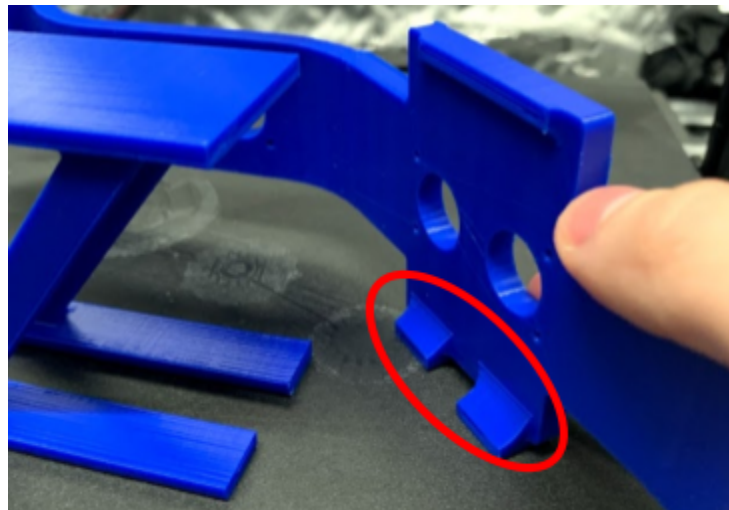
Example of Front Bumper Failure with Small Fillet Highlighted
